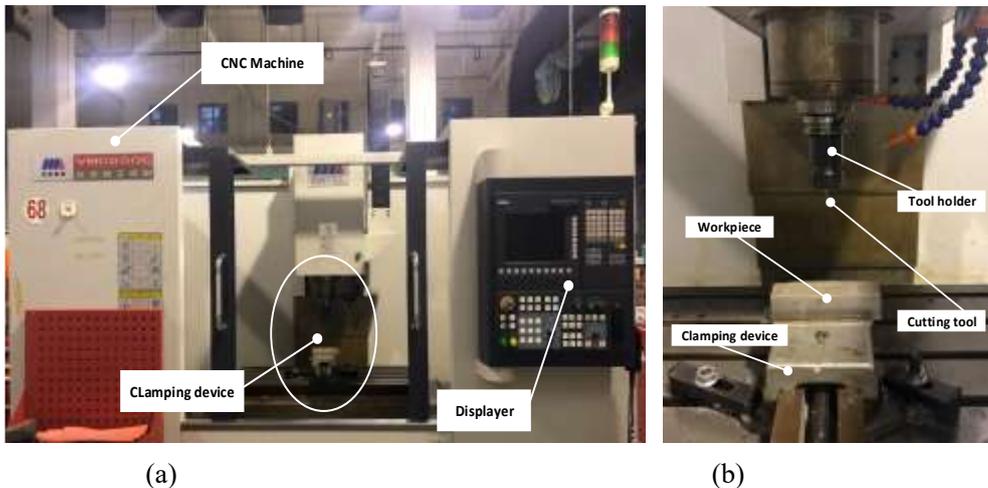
(a) VMC850E machine (b) Machined workpiece and cutting tool
